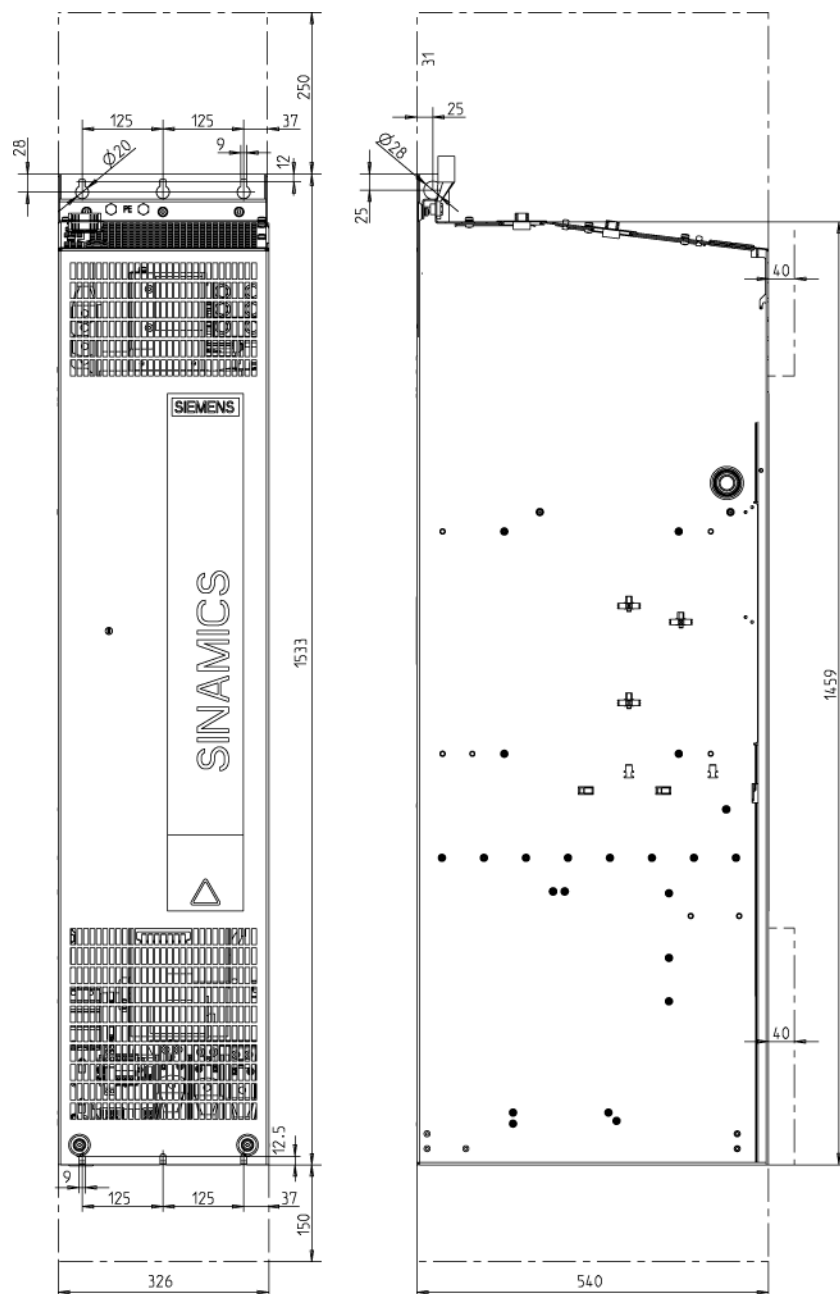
Dimension drawing Active Line Module, frame size GX Front view, side view
